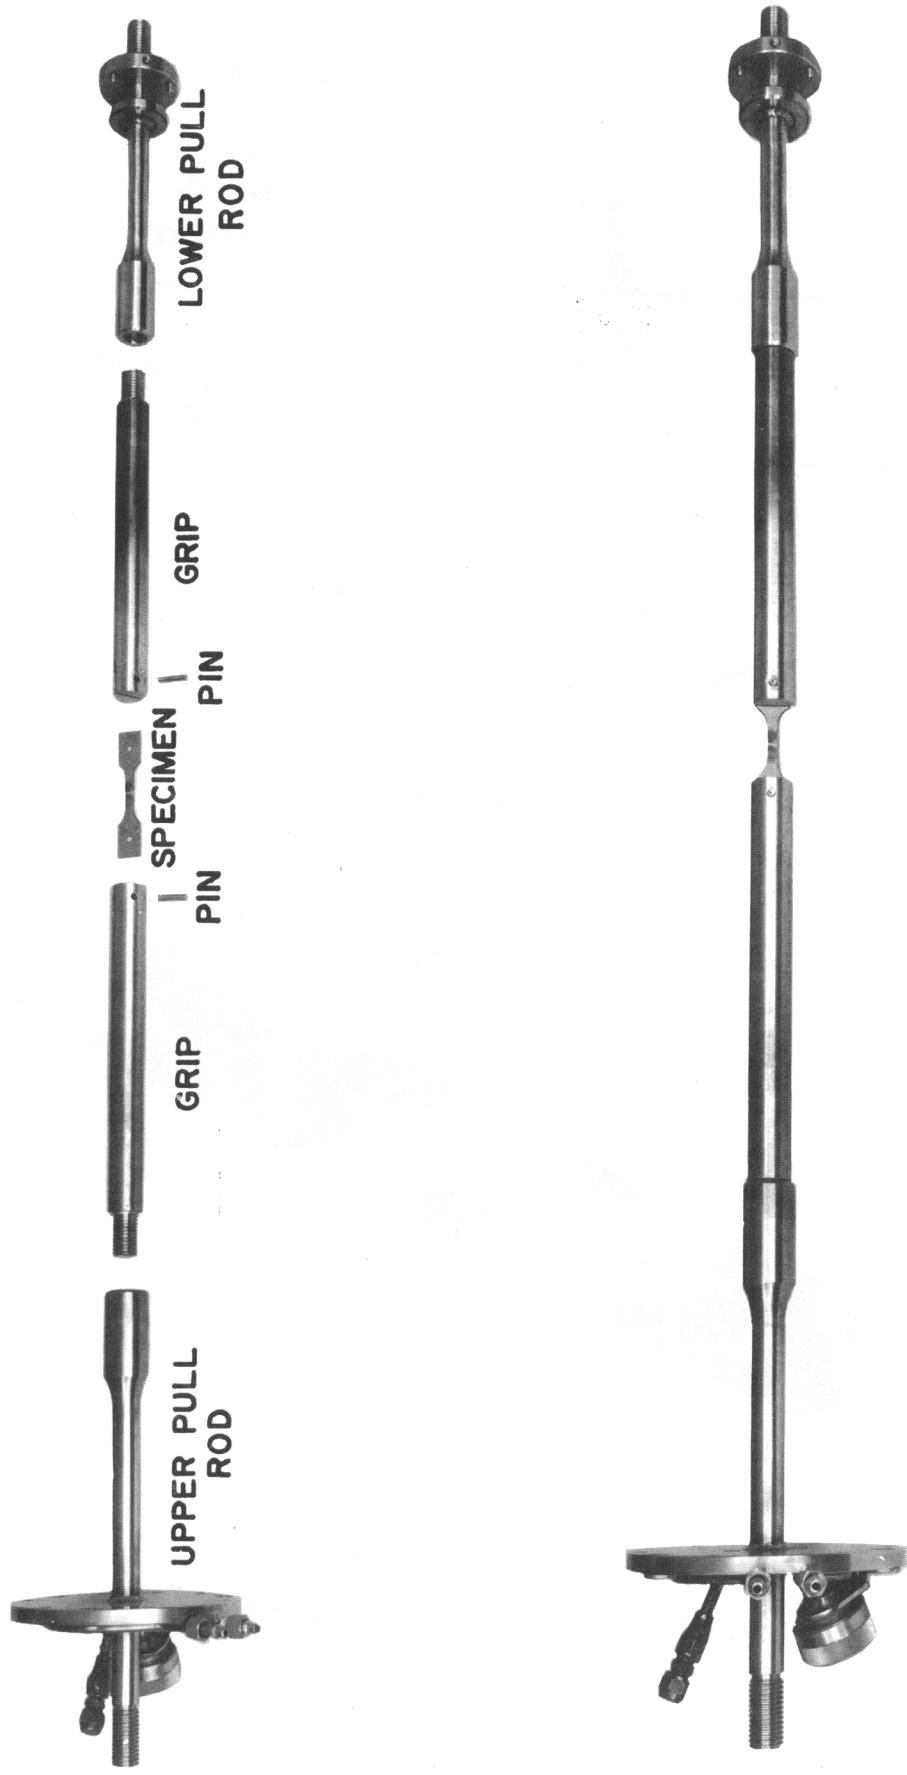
Elevated-temperature Tensile Pull-rod and Grip Assembly; Exploded and Assembled
